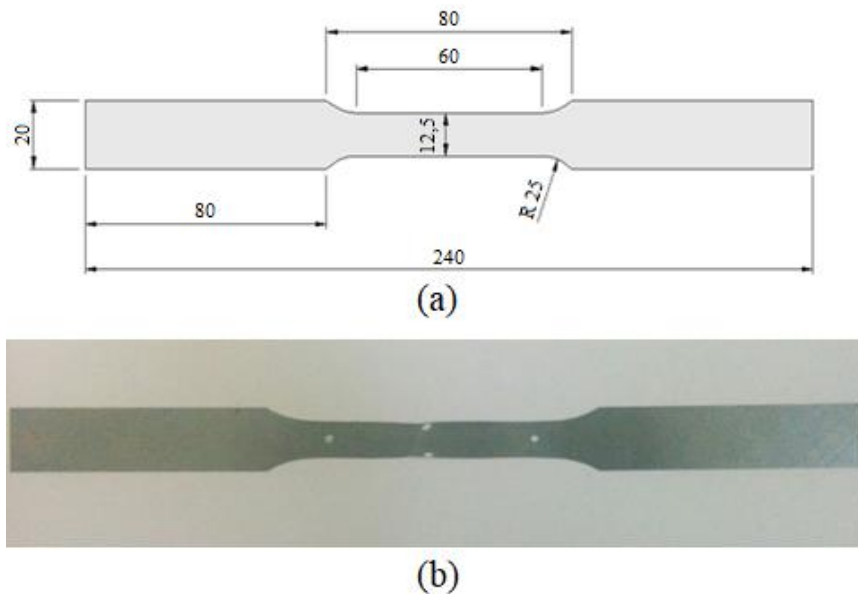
Uniaxial tensile specimen: (a) dimensions in mm and (b) tested specimen.
